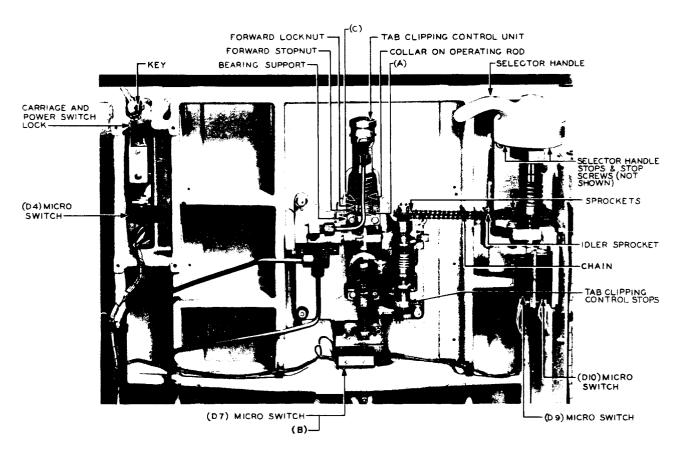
659A and 659D Tools (partial view of front underside of tool)
